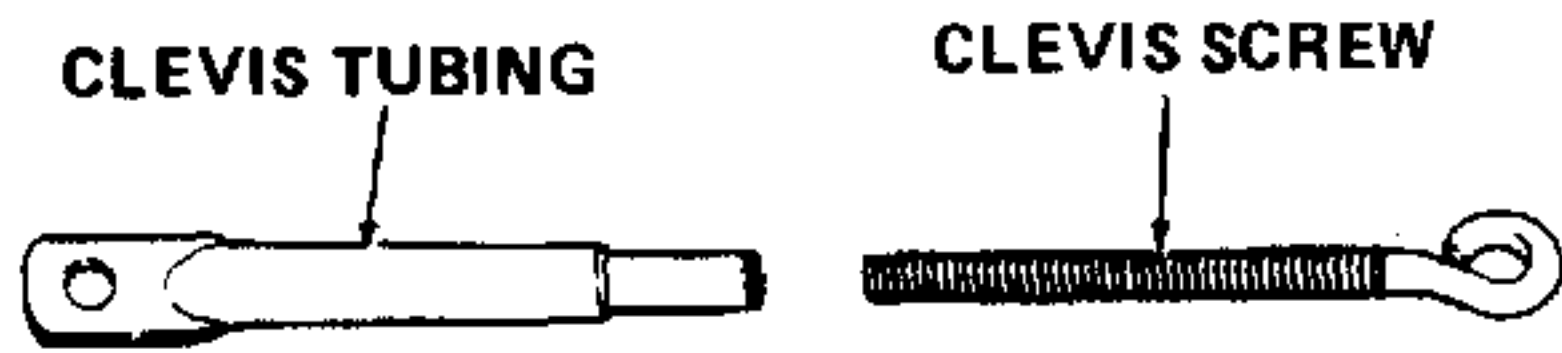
Threading Clevis Screw Into Clevis Tubing.
